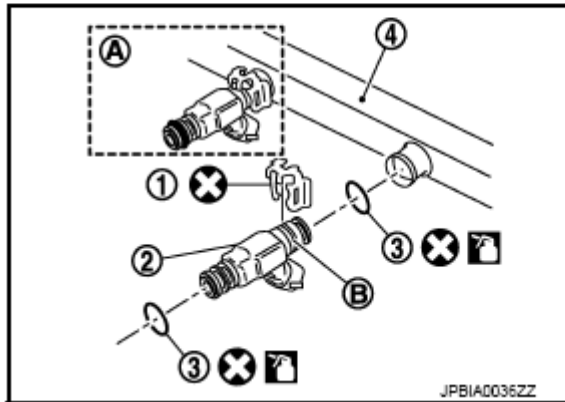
Identifying Fuel Injector And Fuel Tube Components
